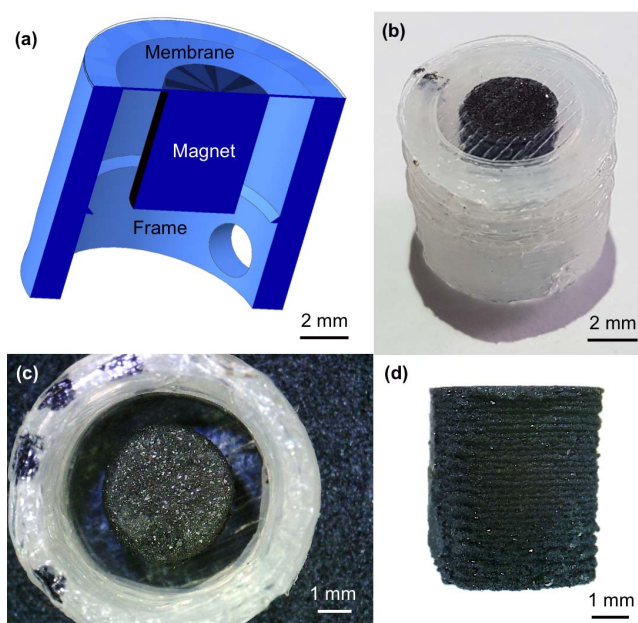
A collection of images of an FFF-printed mini magnetic actuator including (a) a CAD cross-section, (b) top view of a printed actuator, (c) bottom view of the device, and (d) side view of a printed magnet removed from an actuator.
